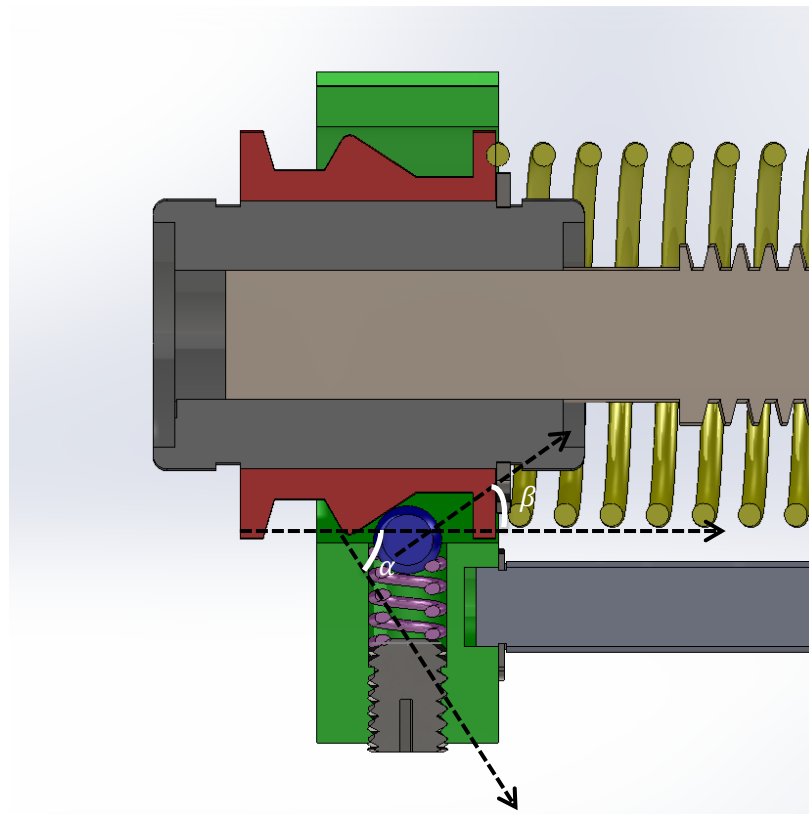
Due to Shape of Hammer, Detent Ball Exerts a Force in the Desired Direction
